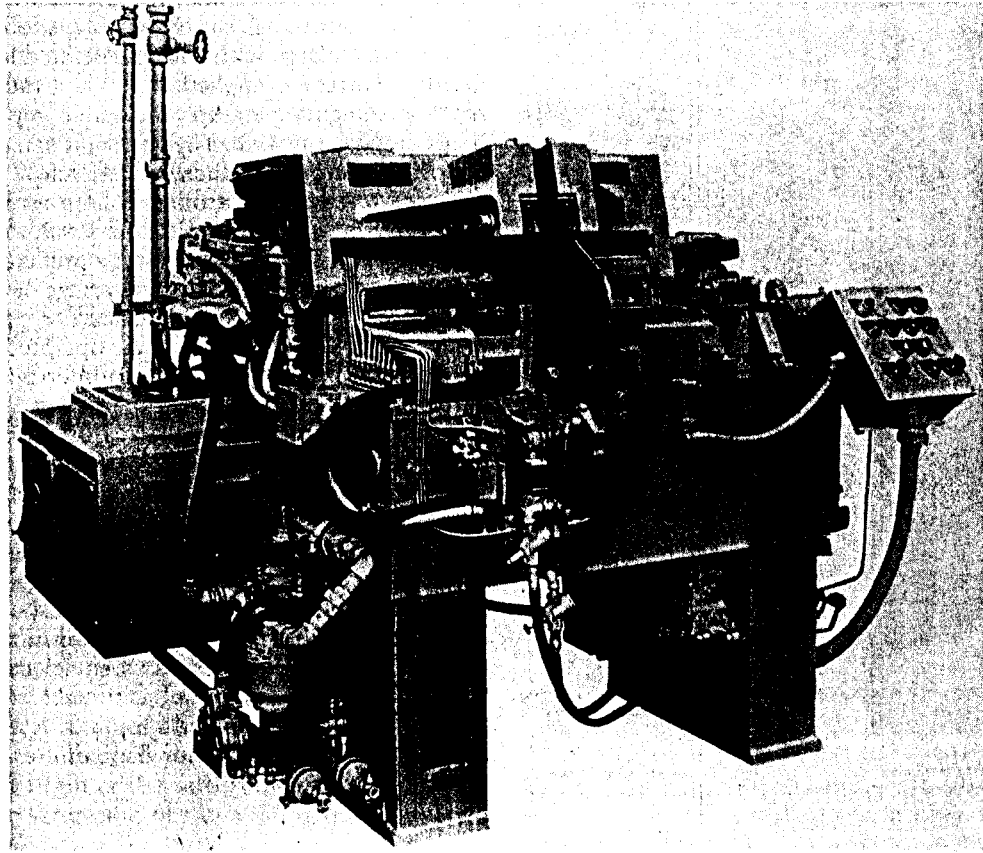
An Automatic Flash Welding Machine with Vertical Alligator Type Clamping
